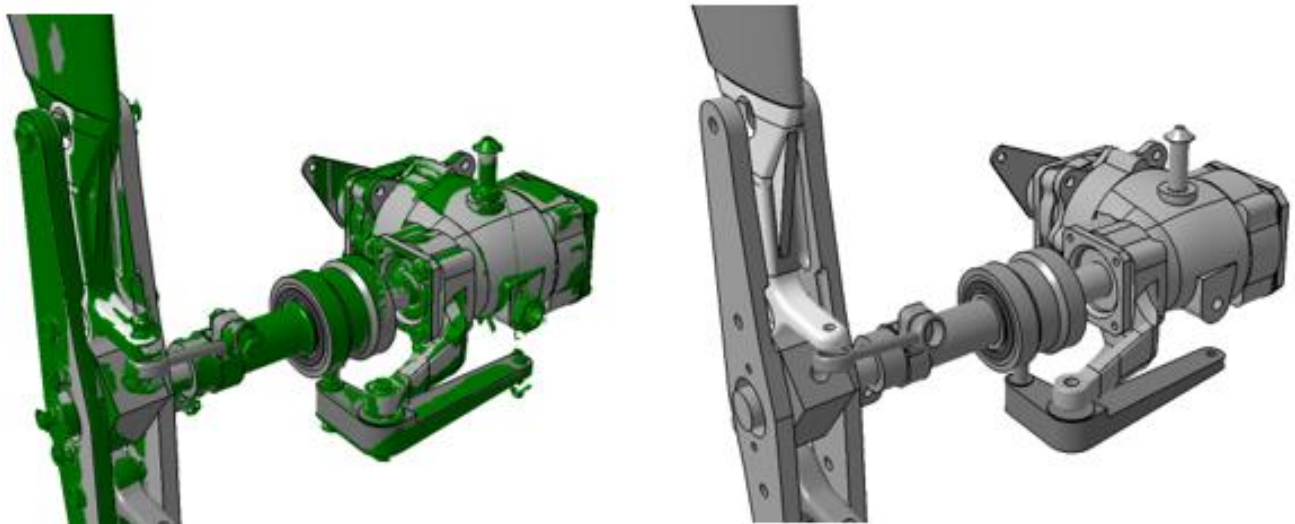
Part 27 Rotorcraft tail rotor assembly CAD with overlaid scan.
